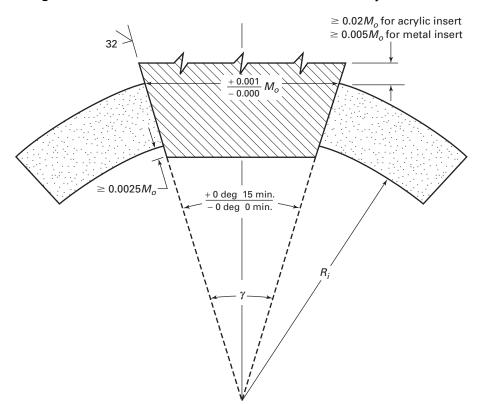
Dimensional Tolerances for Inserts in Acrylic Windows
